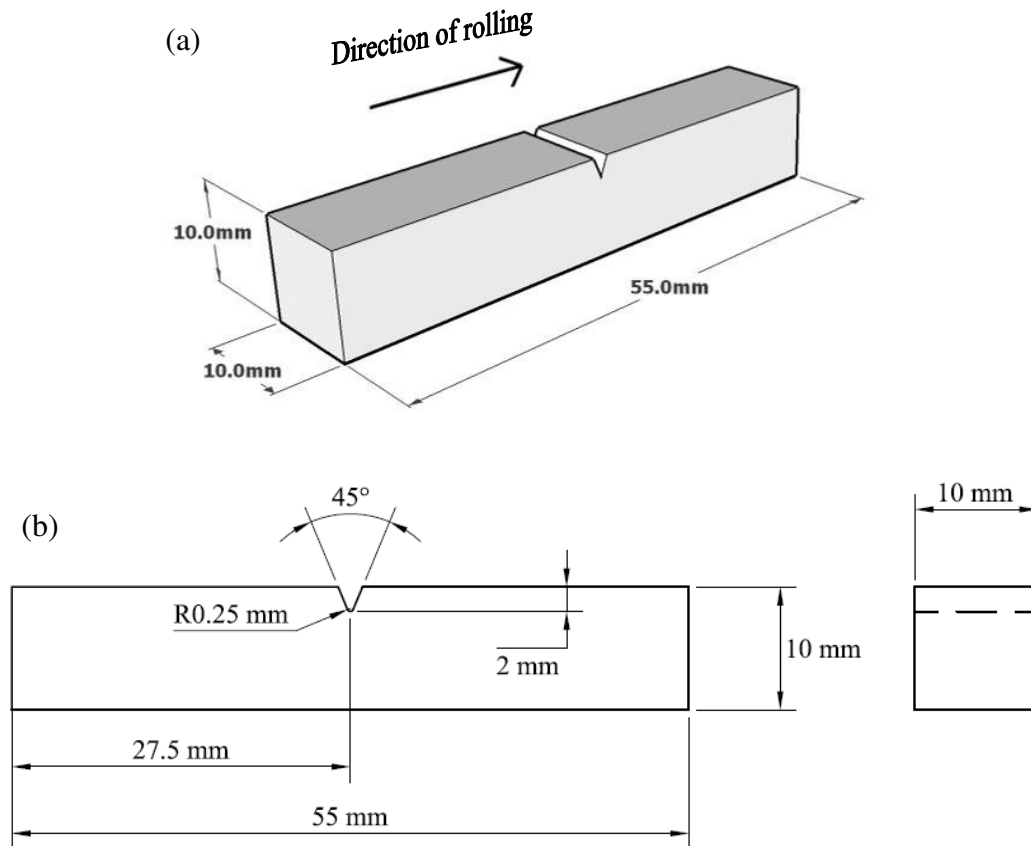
(a) 3D illustration of test specimen, (b) Detail drawing of specimen dimensions.
